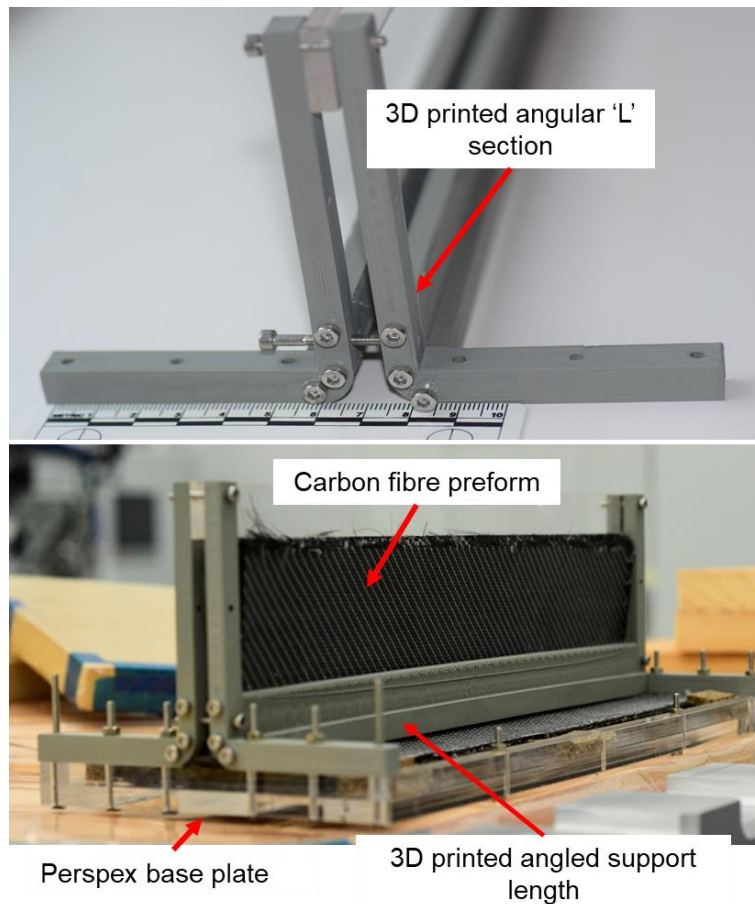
3D printed T-joint frame (top) without and (bottom) with preform.
